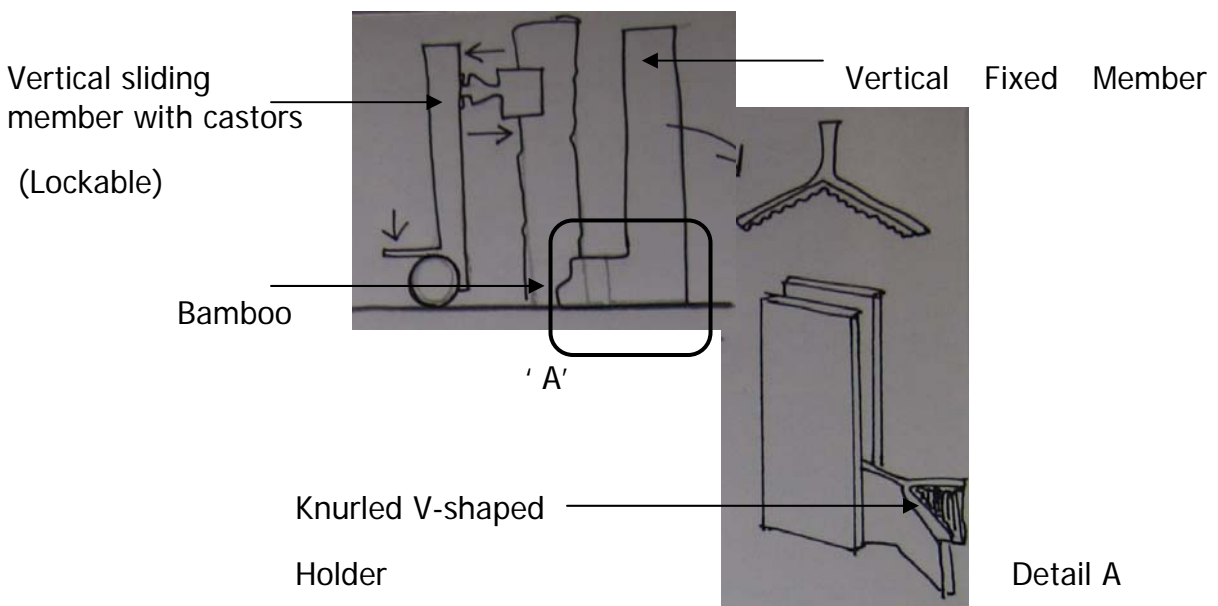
Sketch showing implementation of castor wheel concept to the hand tool
